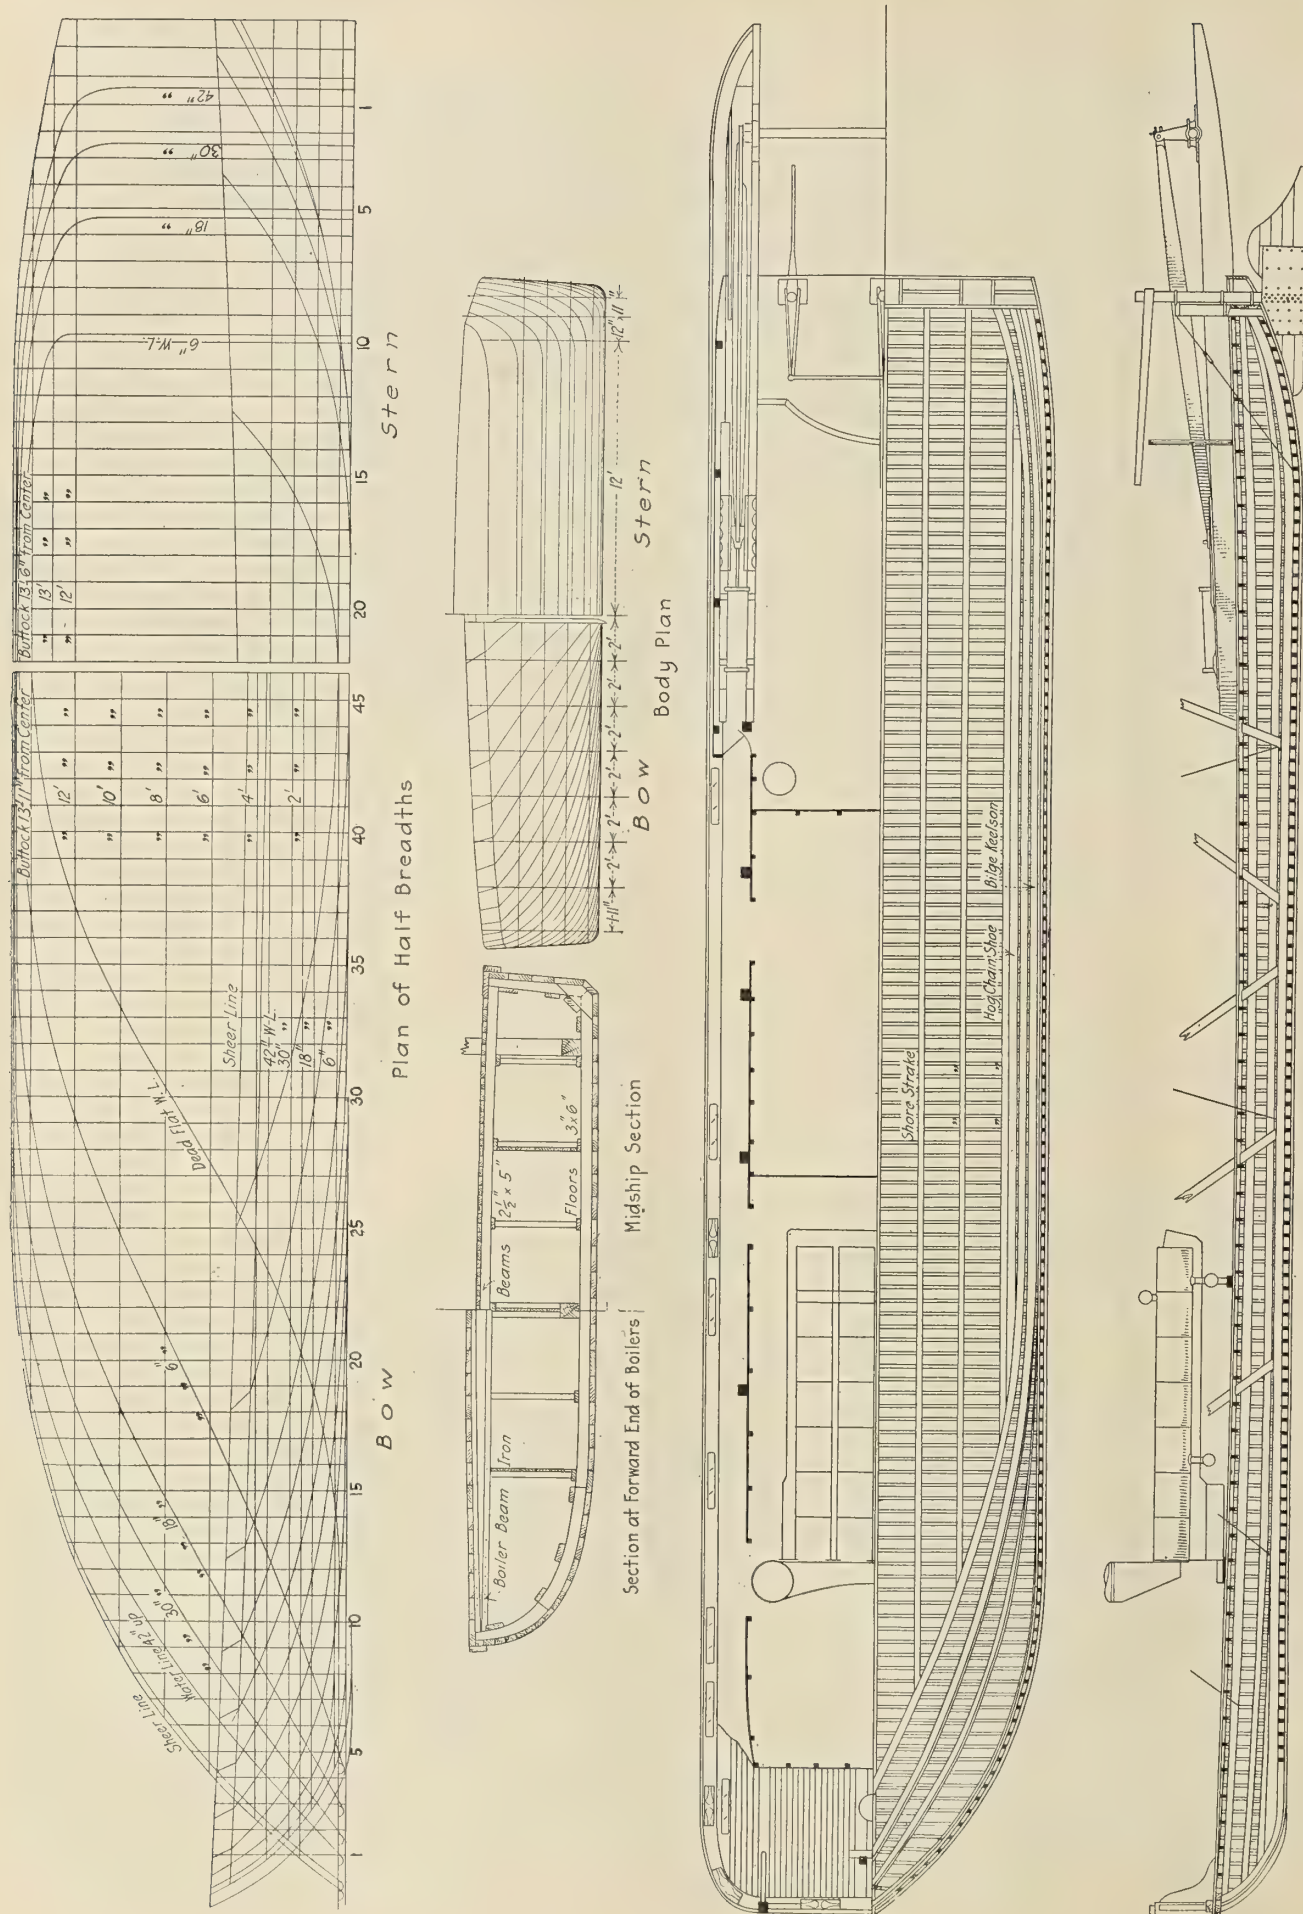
Lines and Construction Plans of Wooden Sternwheel Towboat
